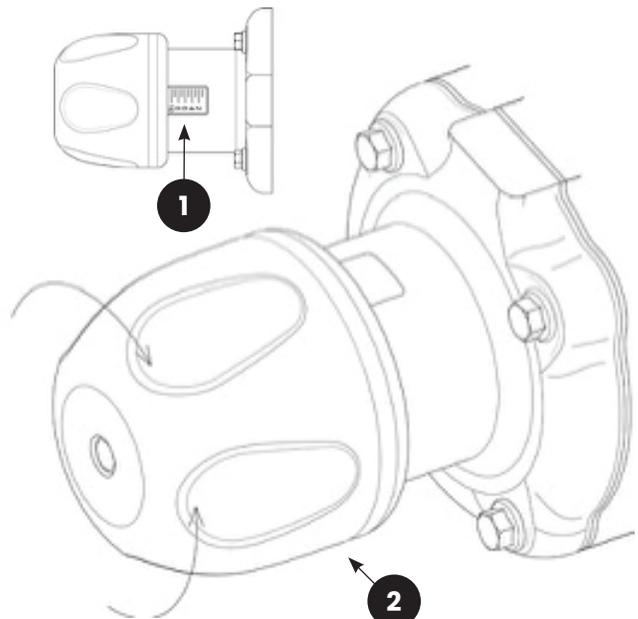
(1) Adjustment-Position Indicator Label; (2) Turn the metering knob clockwise for less abrasive. Turn the metering knob counterclockwise for more abrasive.
